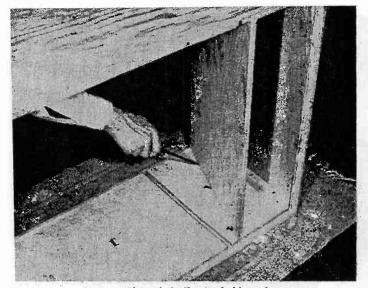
Slanted baffle is held with 3 screws at each end. Those at bottom go through bottom panel up into the piece.
